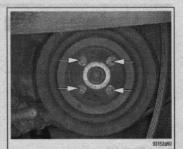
Unfasten the crankshaft pulley retaining bolts, then remove the pulley
